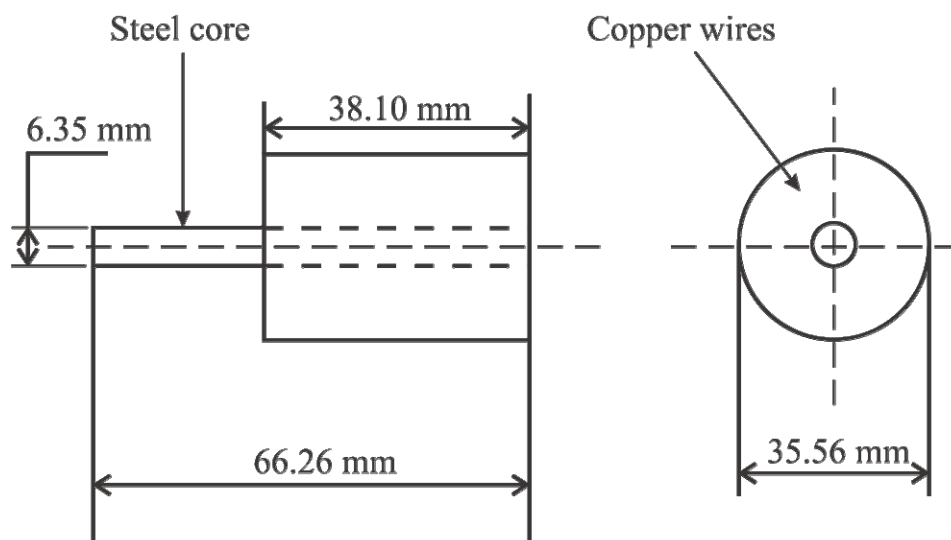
Dimensions of the electromagnet (in the units of mm)
